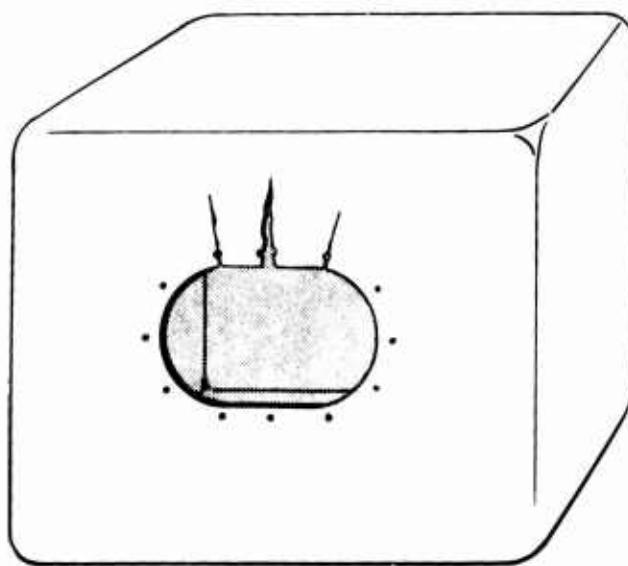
Tank Wall Failure as a Result of Overstressed Bearing Holes.
